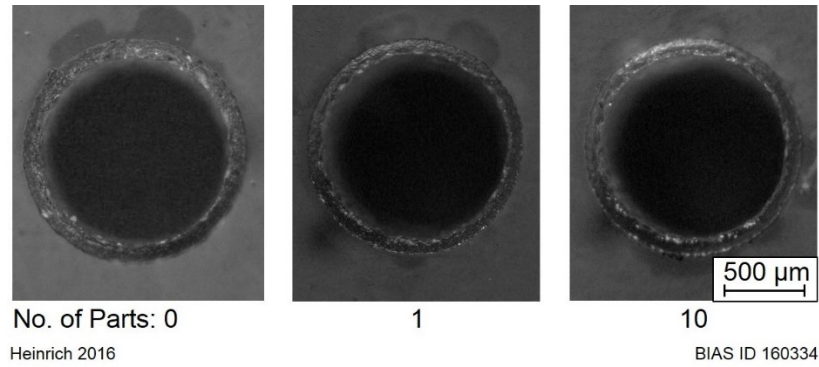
Top view of glass tool before forming and after one and ten cups were drawn.
